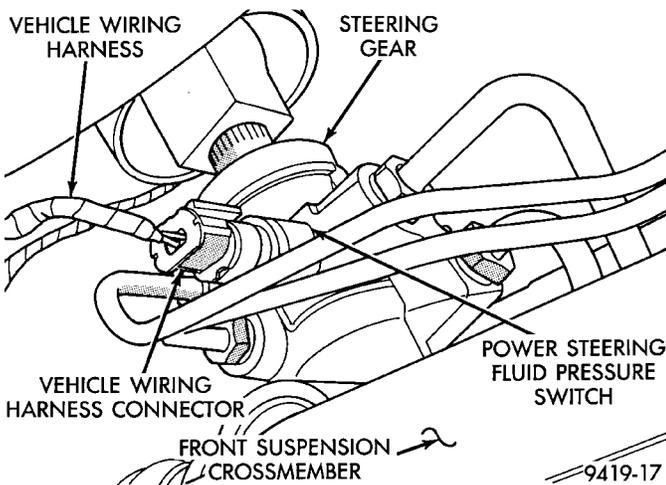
Power Steering Pressure Switch Location On Steering Gear
